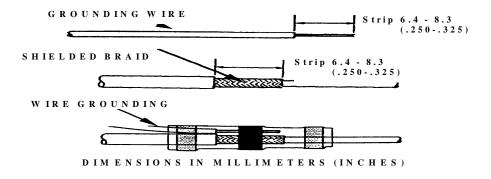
Individual Shield Termination Using a Heat Shrinkable Solder Sleeve
